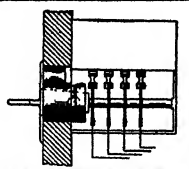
Lamp socket which is locked automatically when the lamp is in place, preventing C. A. Baker.
